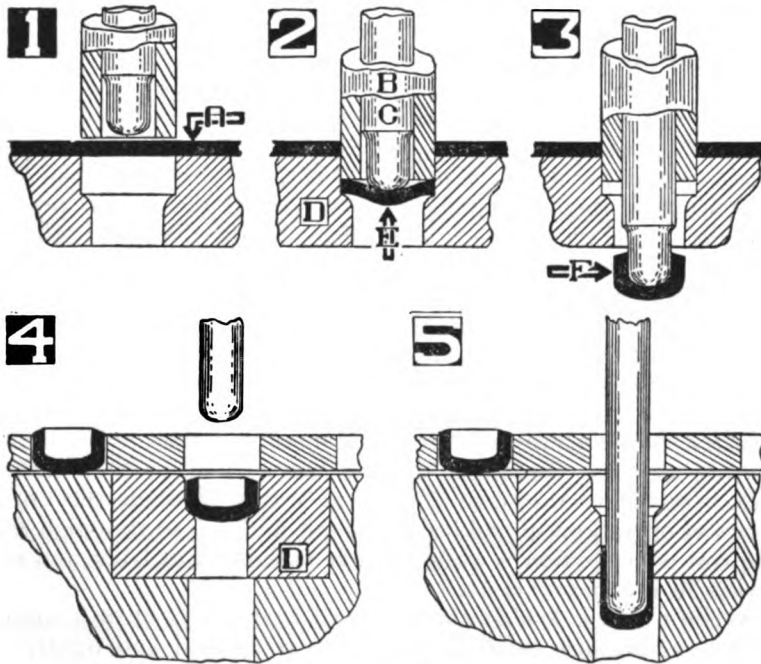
DIES, AND THE DRAWING OF THE CUP
